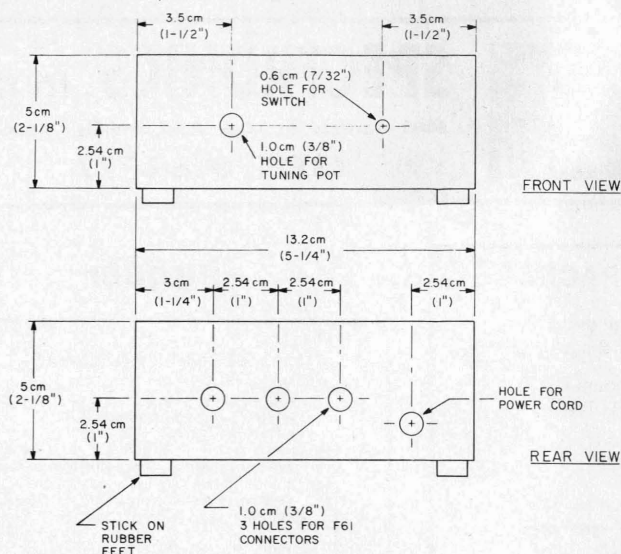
Front and rear panel layout of the power supply/tuning unit chassis.
